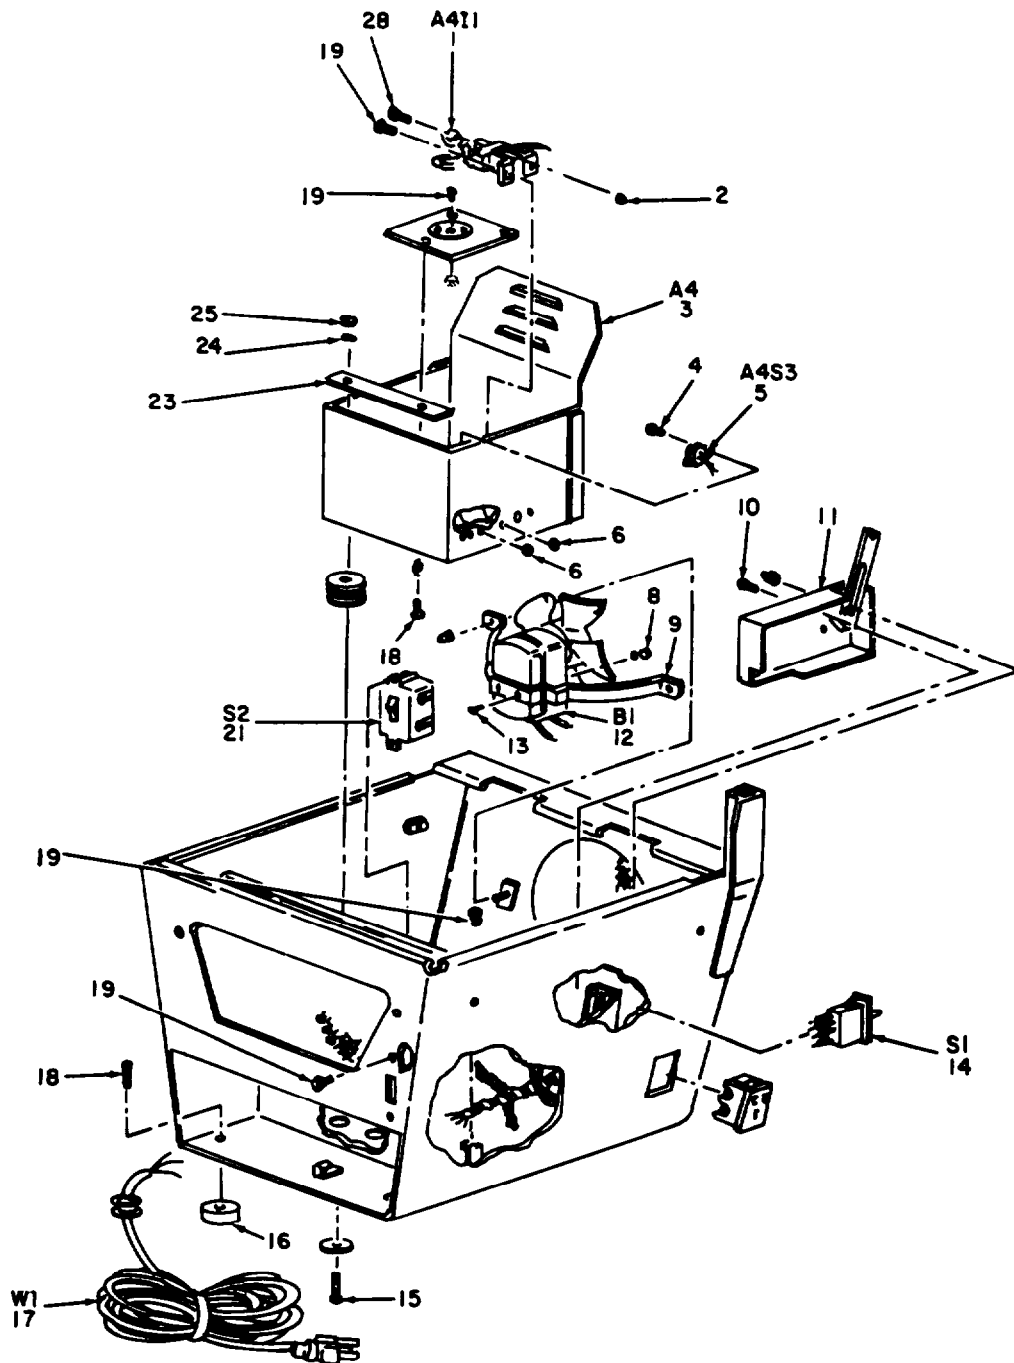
Projector, Overhead, Still Picture PH-637D/PFP, Exploded View.
